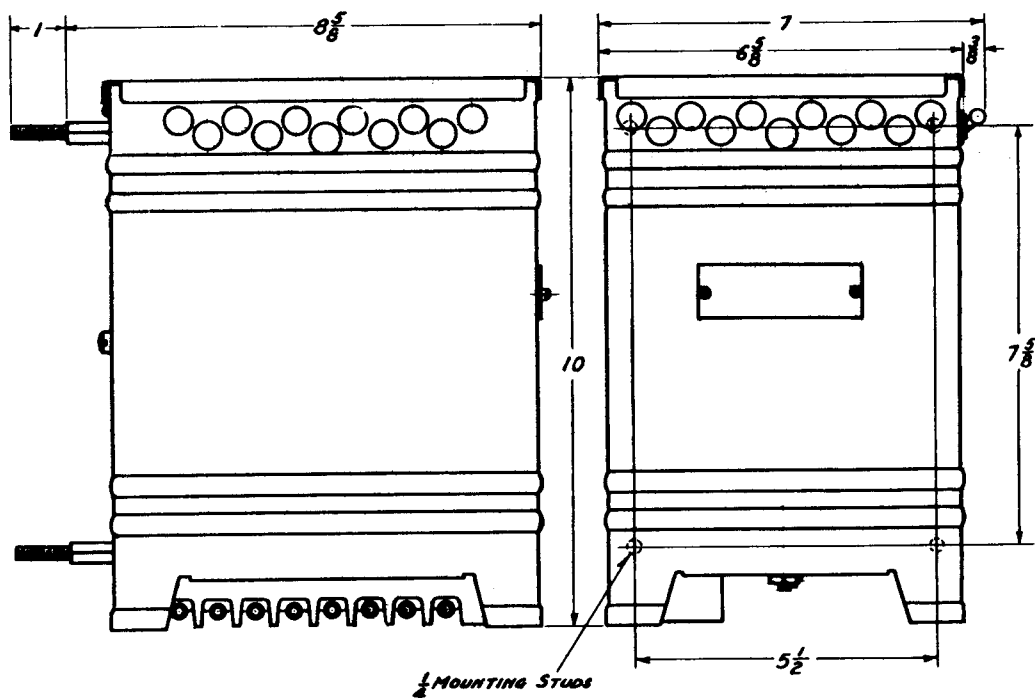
Outline Drawing for "B" Eliminator Used with Type XT Automatic Synchronizer
